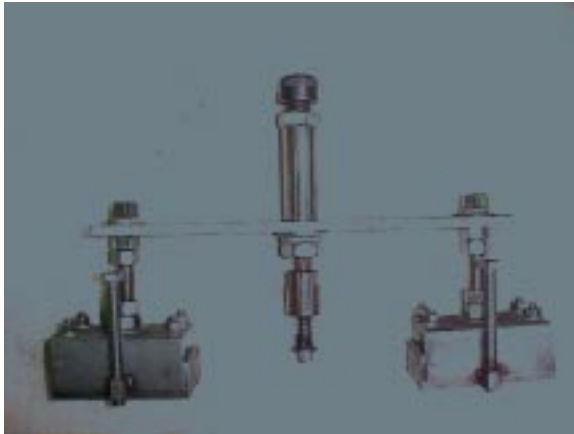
MAGNETIC CLAMP ASSEMBLY
